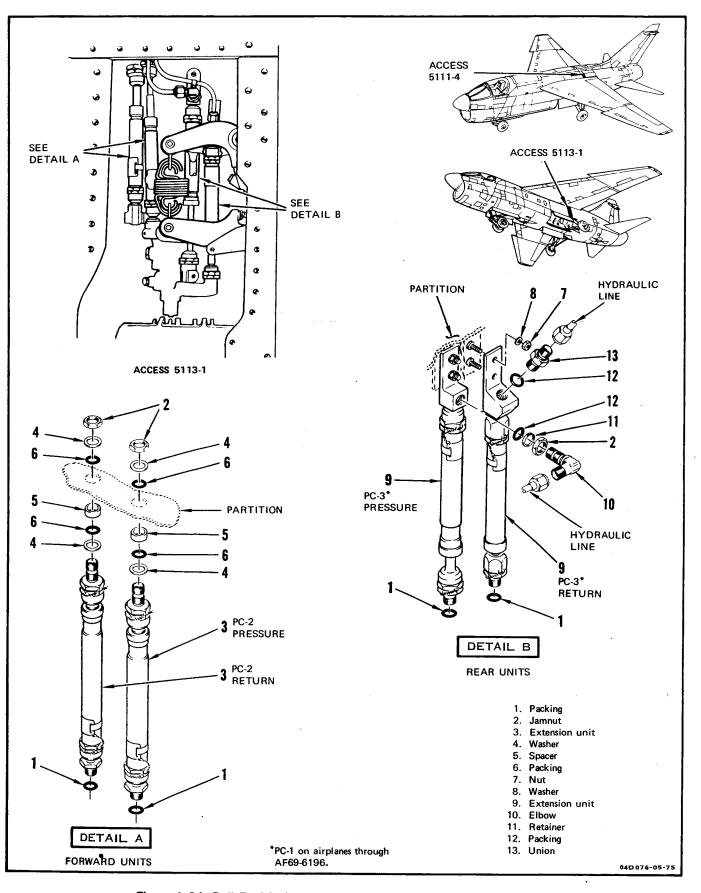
Roll Feel Isolation Extension Unit Removal and Installation
